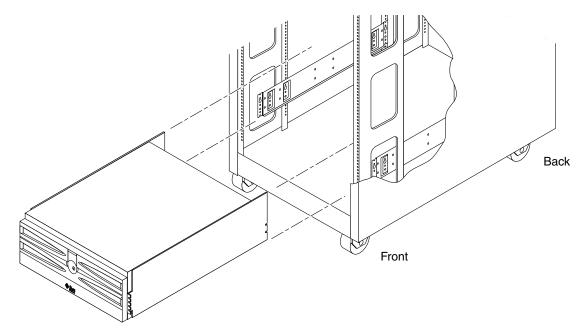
Aligning the Mounting Tray With the Mounting Brackets
